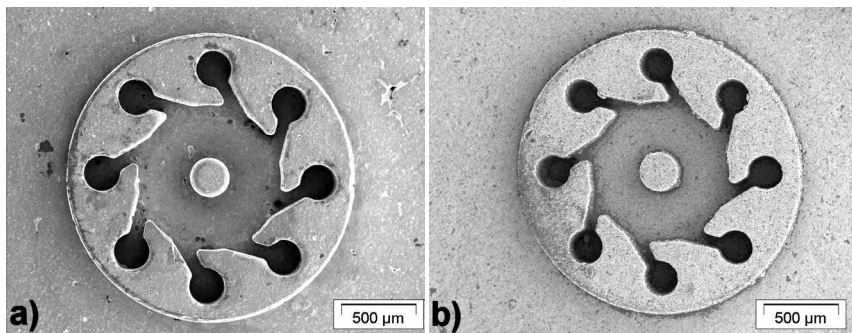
Cast turbine parts made of different alloys. a) Al-bronze; b) CoCrMo alloy
